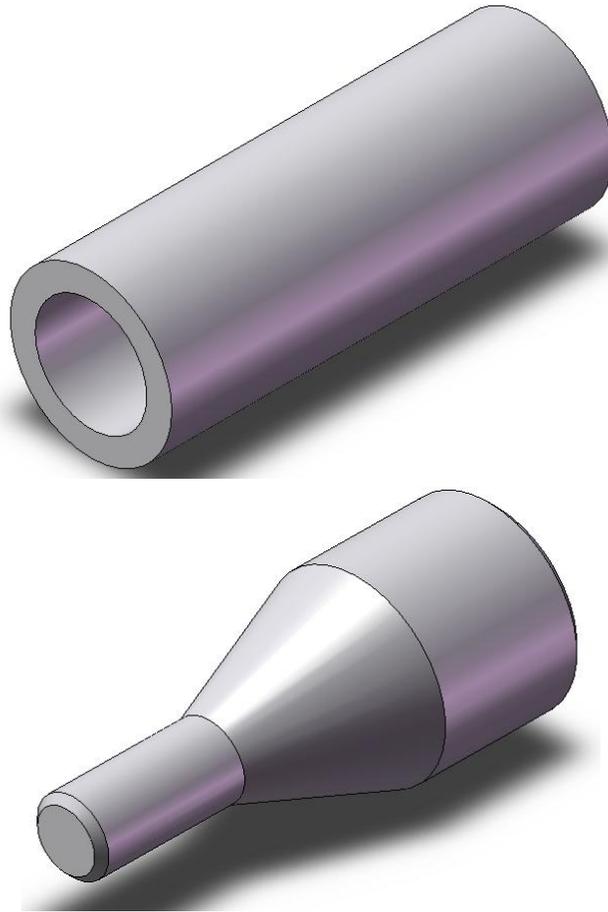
Gearbox (top) and Generator (bottom) shaft couplers
